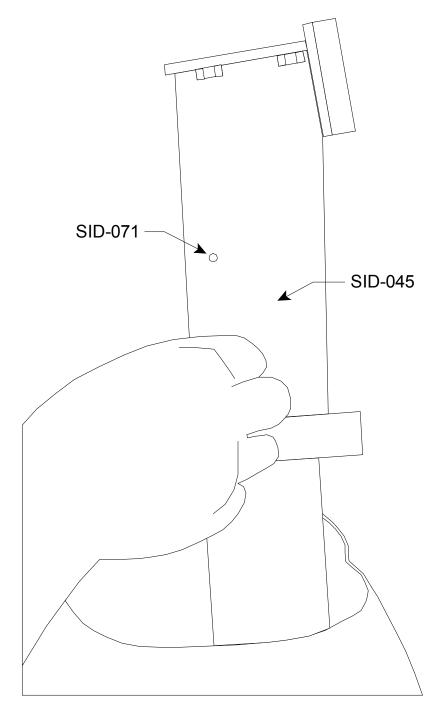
REMOVAL OF ACCELEROMETER MOUNTING PLATE FROM THORACIC SPINE BOX
